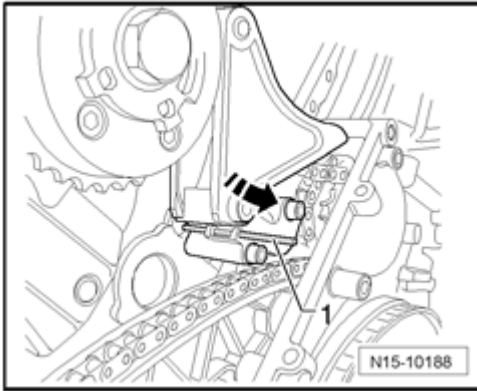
Pushing Chain Tensioner For Camshaft Roller Chain In And Securing Chain Tensioner
